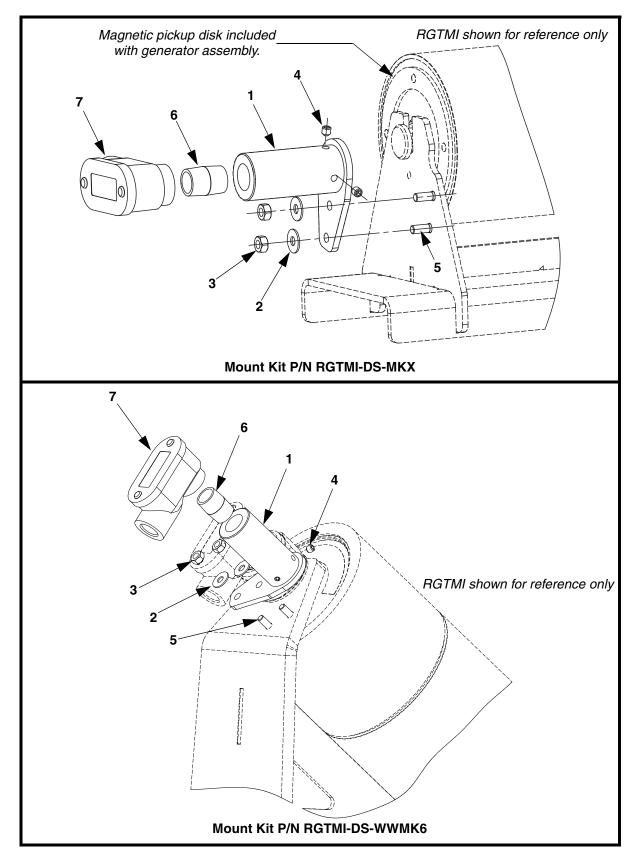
Martin[®] Roll Generator Direction Sensor Mount Kit
